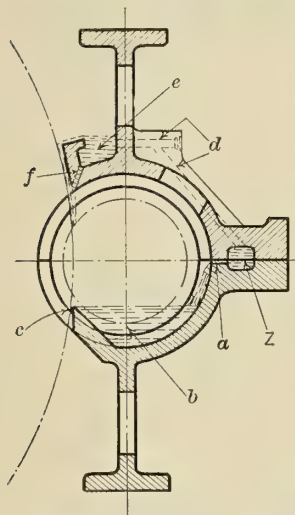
Section Through Pinion Frame, Showing Method of Lubrication
